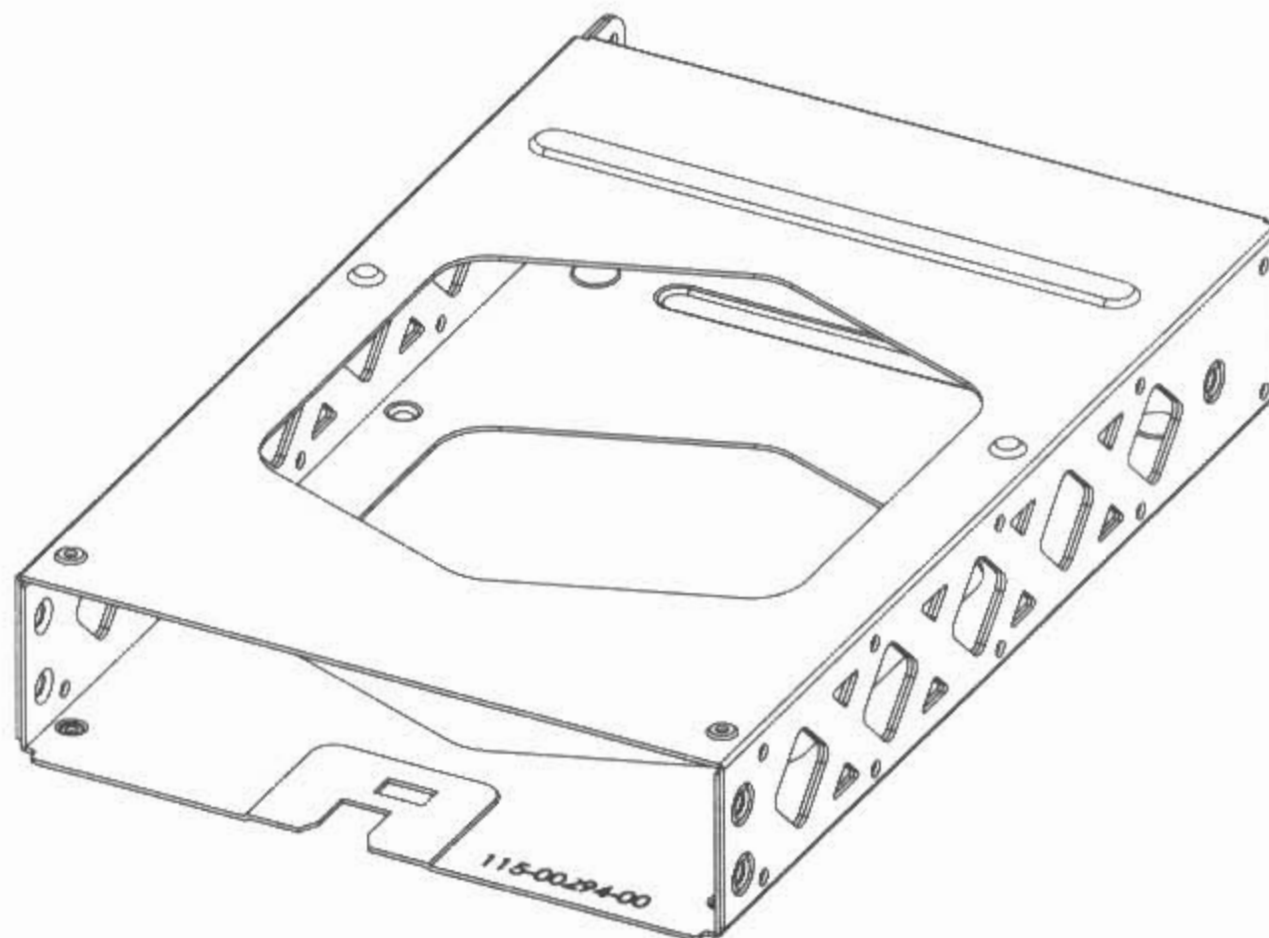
GTX 330 Install Rack (115-00294-00)
